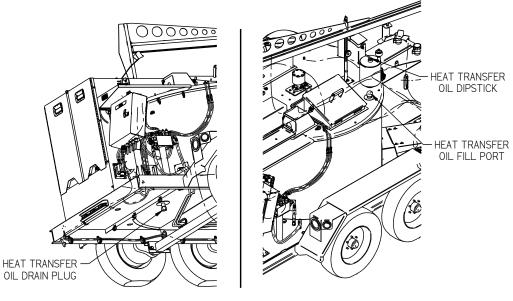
Heat Transfer Oil Drain Plug and Fill Ports
